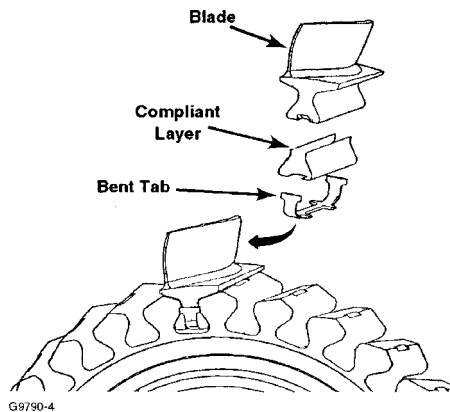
331-200[CT] MOD 0 ceramic blade attachment scheme employed a compliant layer with a conventional metal bend tab retainer
